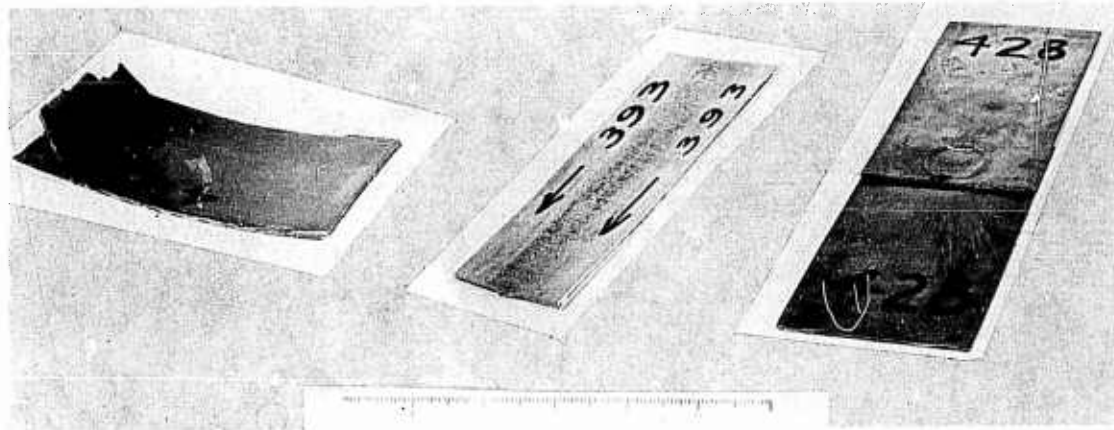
Types of explosive welds. Left: area weld; middle: seam weld; right: spot weld
